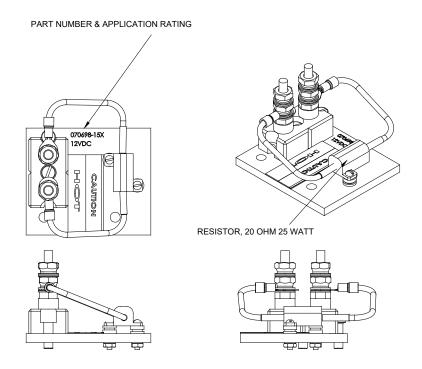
Entrance Gate Terminal Board Assembly & Replacement Parts
